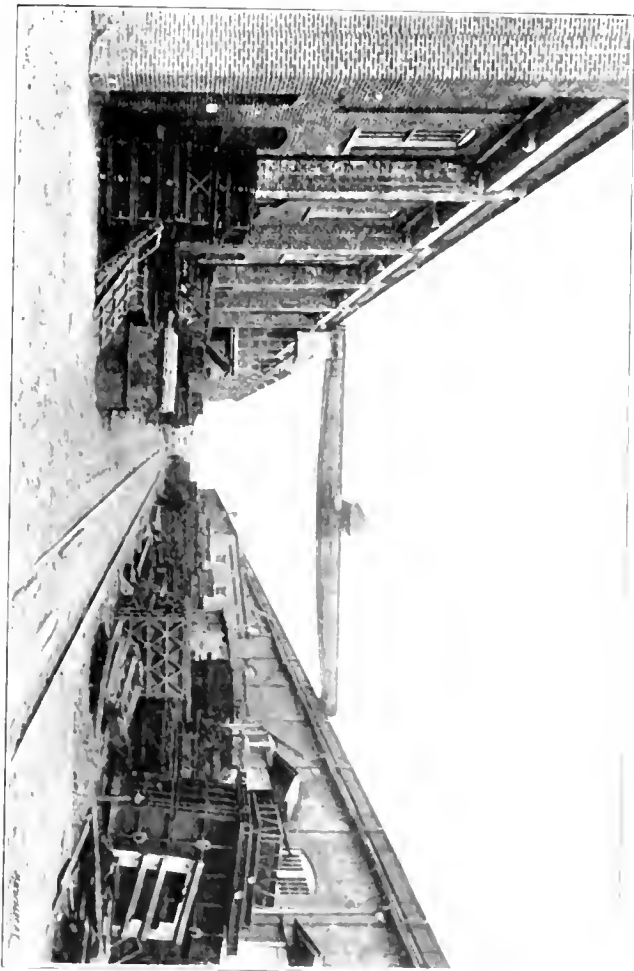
Flask Yard between Foundry and Pattern Buildings. This yard is served by Traveling Crane and a Broad-gage Track.
